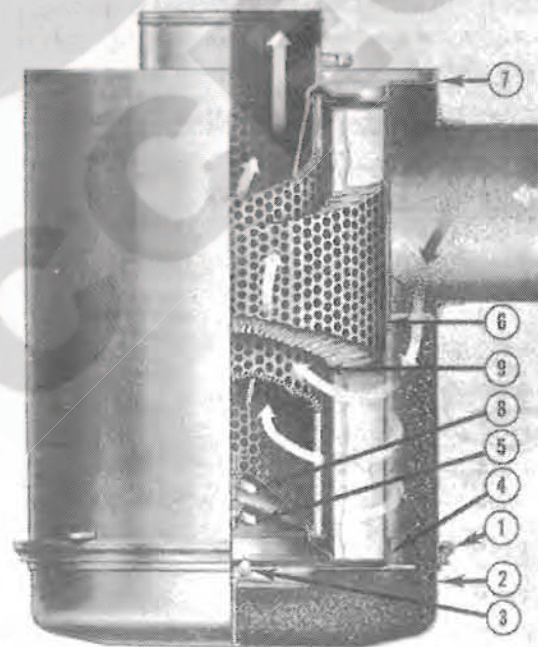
, (OM1030L). Air cleaner—heavy duty dual element
